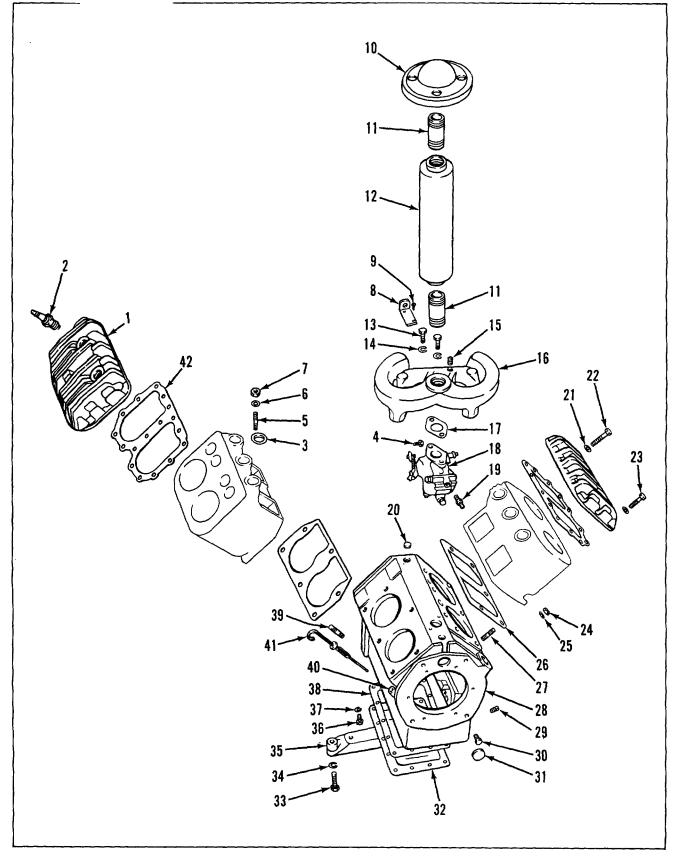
MANIFOLD AND CRANKCASE GROUP
